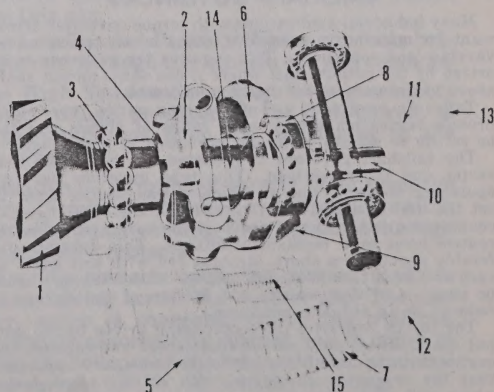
Sectional Drawing of a Pierce Centrifugal Governor
